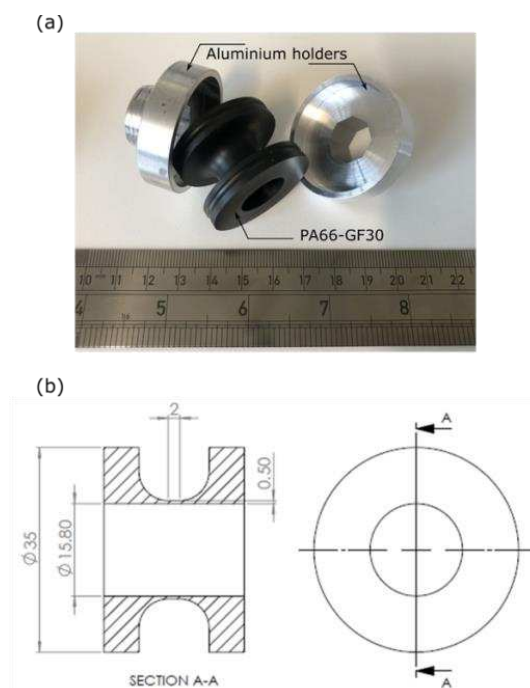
(a) Photo of a PA66-GF30 specimen and aluminium holders; (b) geometry and dimensions of the specimen
